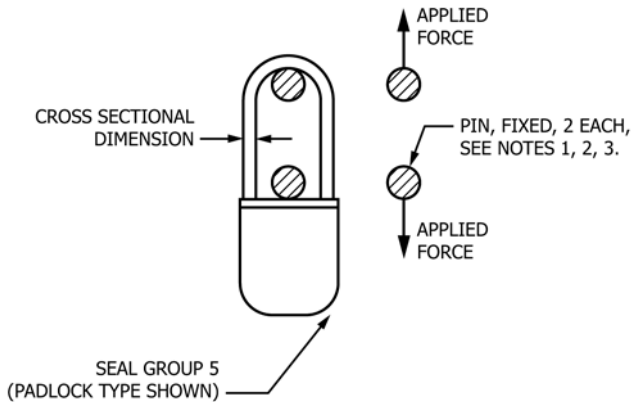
Schematic Drawings of Pull (Tensile) Test Fixture Requirements for Group 5
